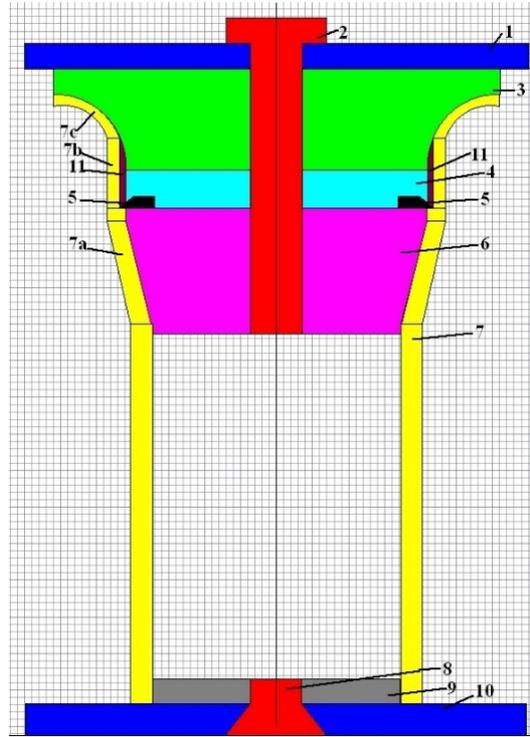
A longitudinal section of the assembly after the beginning of the plastic deformation: 1. Frontal cross-beam; 2. Fixing screw for the penetrating assembly ; 3. Bending flange; 4.Support flange for cutting; 5. Cutting tools; 6. Tapered penetrator; 7. Undeformed pipe; 7.a. Expanded pipe; 7.b. Pipe with internal channel manufactured by cutting; 7.c. Pipe bent at 90°; 8. Fastening screw for guiding flange; 9. Cylindrical guiding flange for deformable pipe; 10. Fixing plate for the penetrating assembly and the buffer pad; 11. Channels machined by cutting
